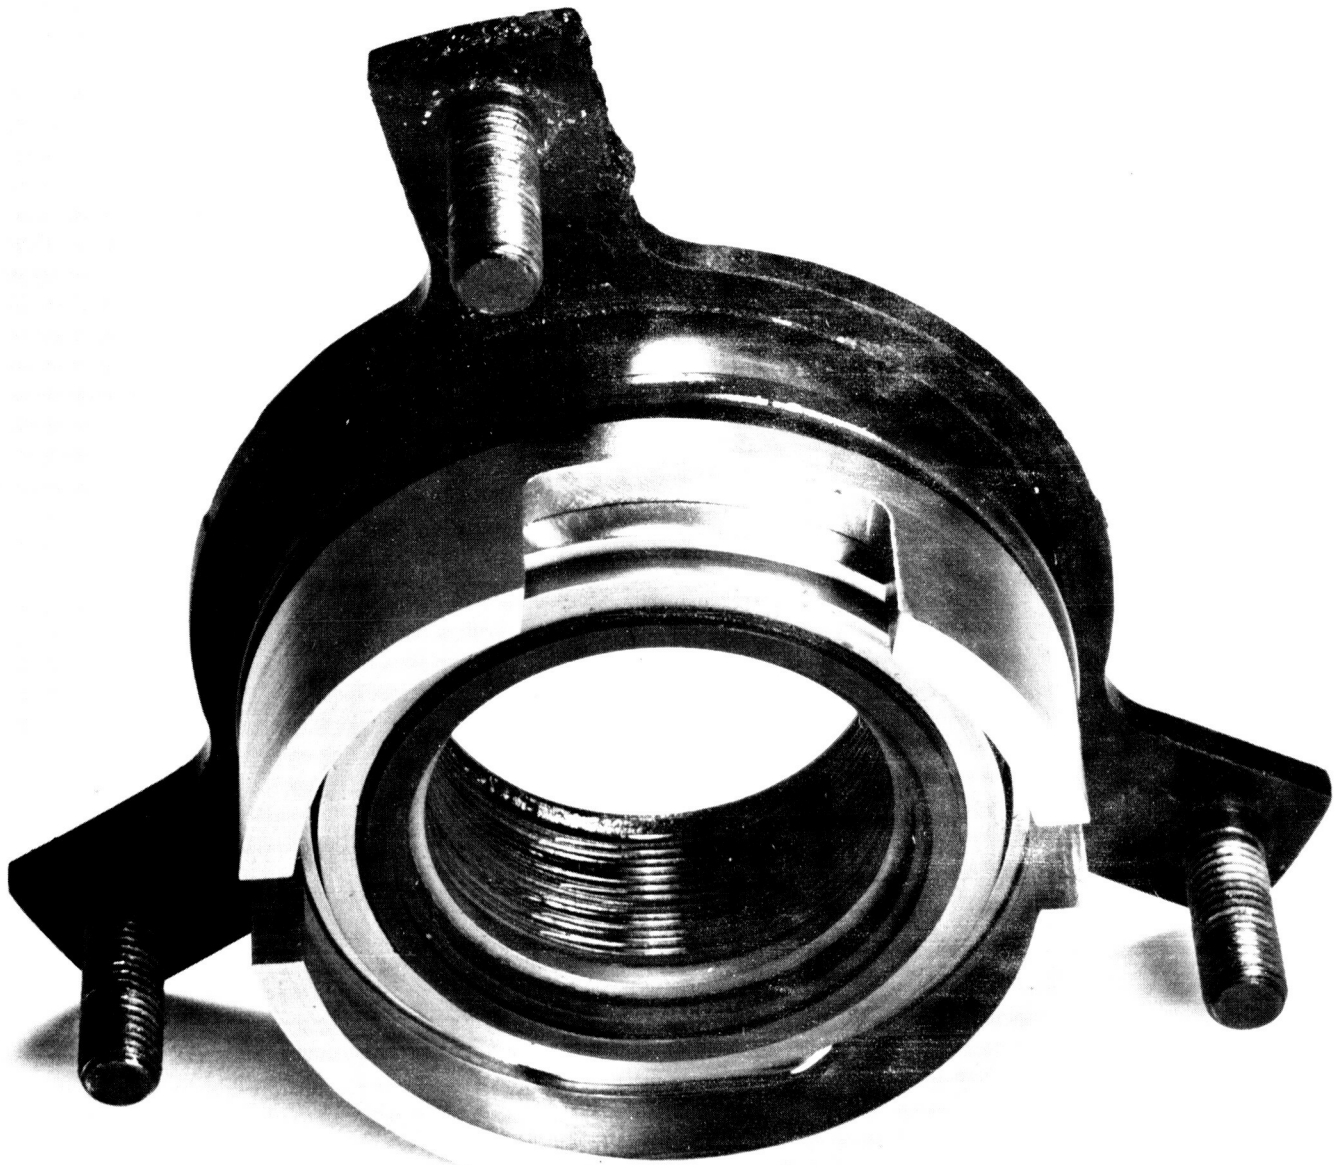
SEAL CARTRIDGE SHOWING CARBON SEAL FACE
